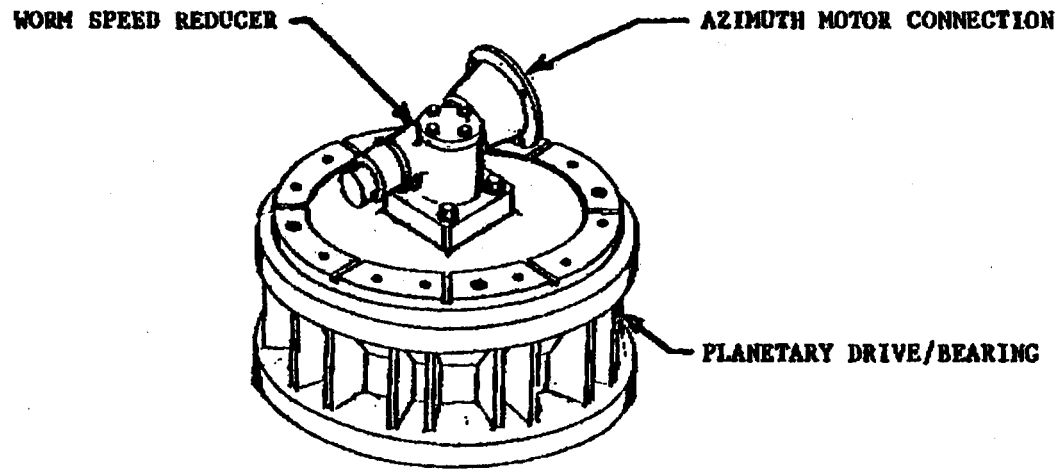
Azimuth Drive/Bearing Assembly
